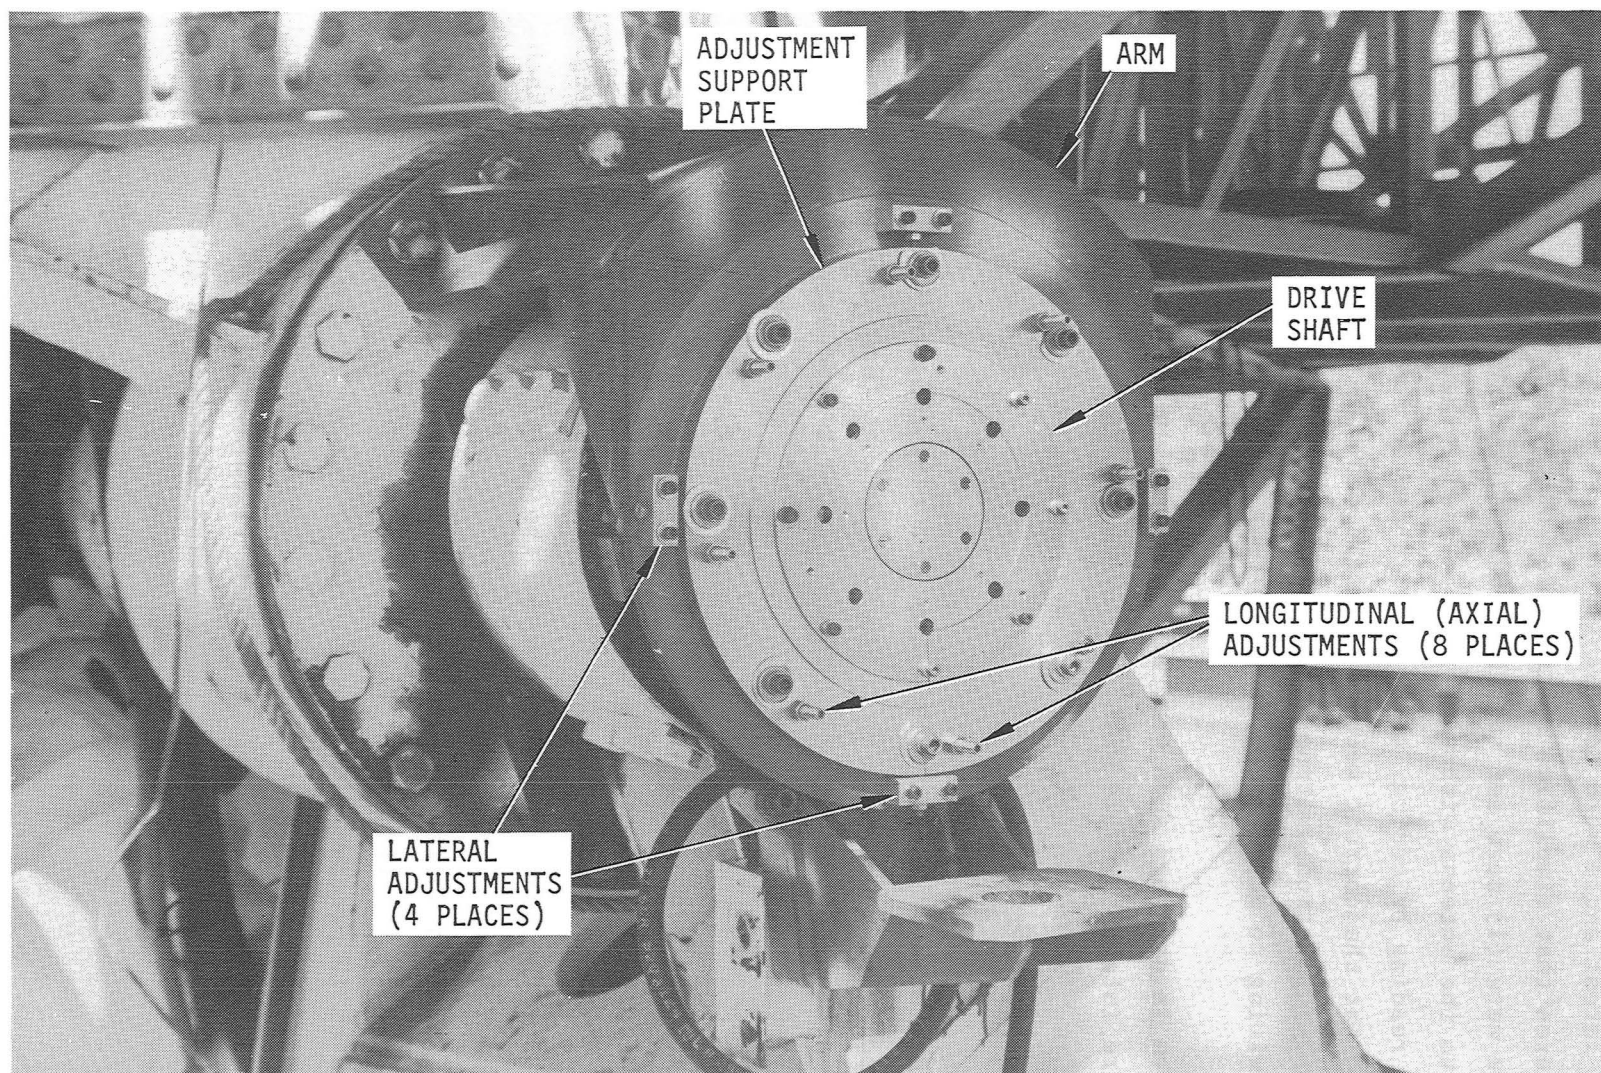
Angle Encoder Mounting Arrangement (DSS 12 Dec Axis)
